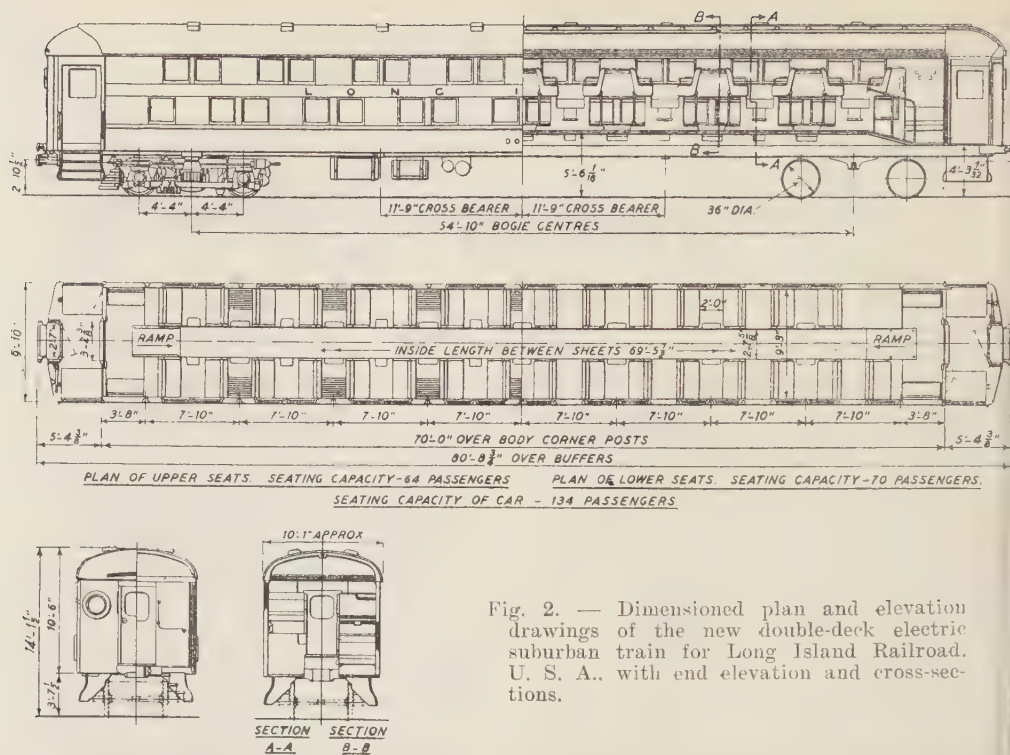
Dimensioned plan and elevation drawings of the new double-deck electric suburban train for Long Island Railroad, U. S. A., with end elevation and cross-sections.
